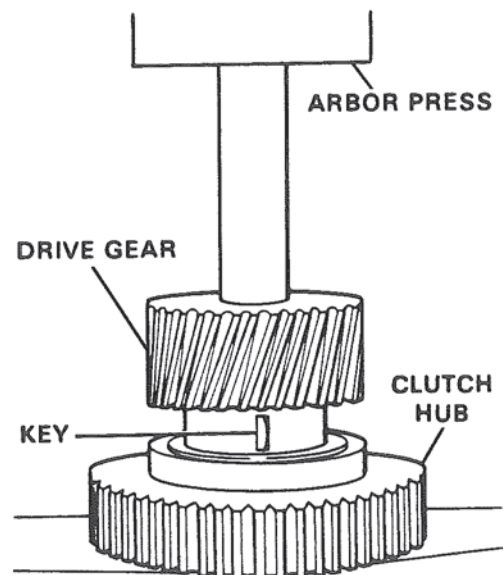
Pressing Drive Gear into Forward Clutch Hub.
